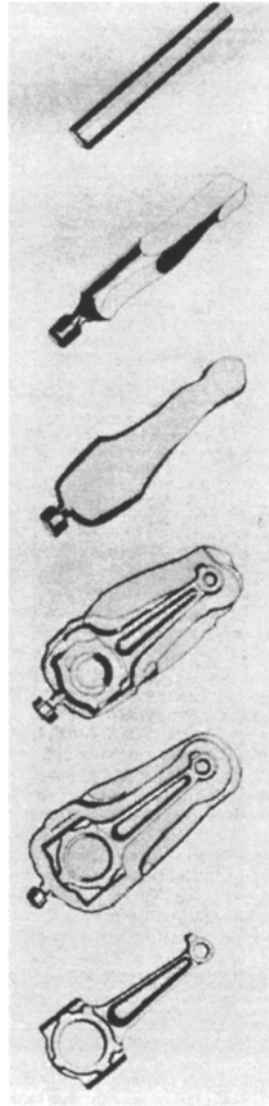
Die set and forging steps for the manufacture of an automobile engine connecting rod. (Reproduced courtesy of Forging Industry Association.)
